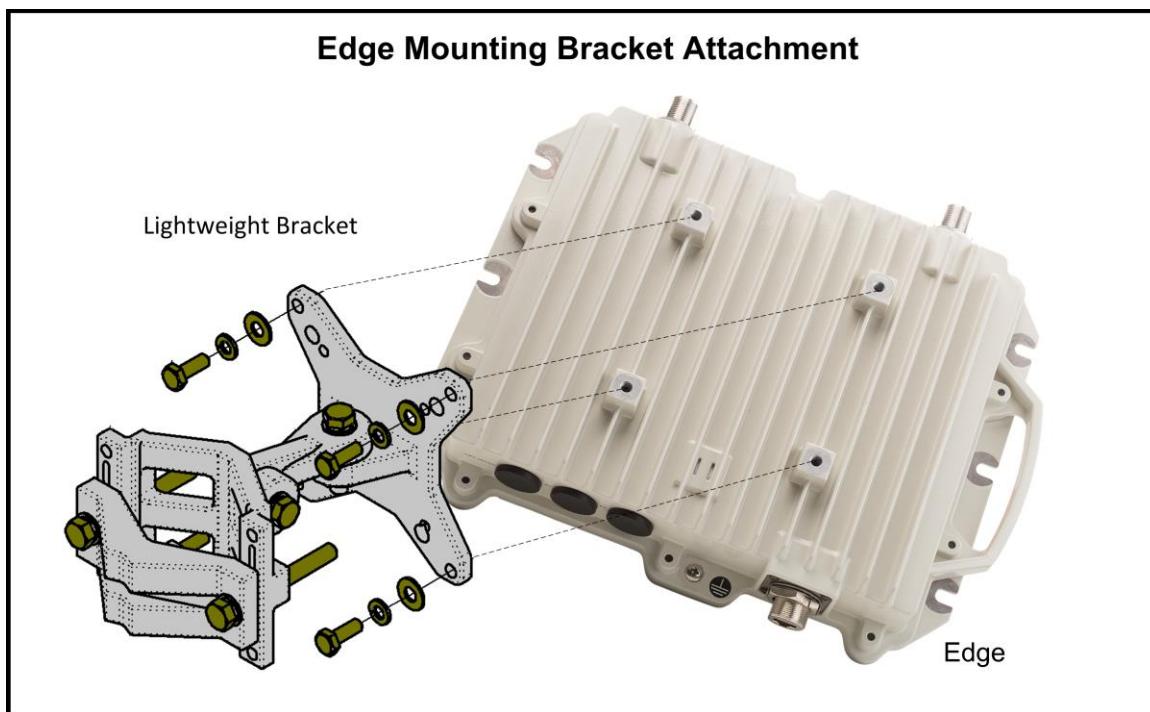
Installation: Mounting Kit - Attach Arm to Edge
